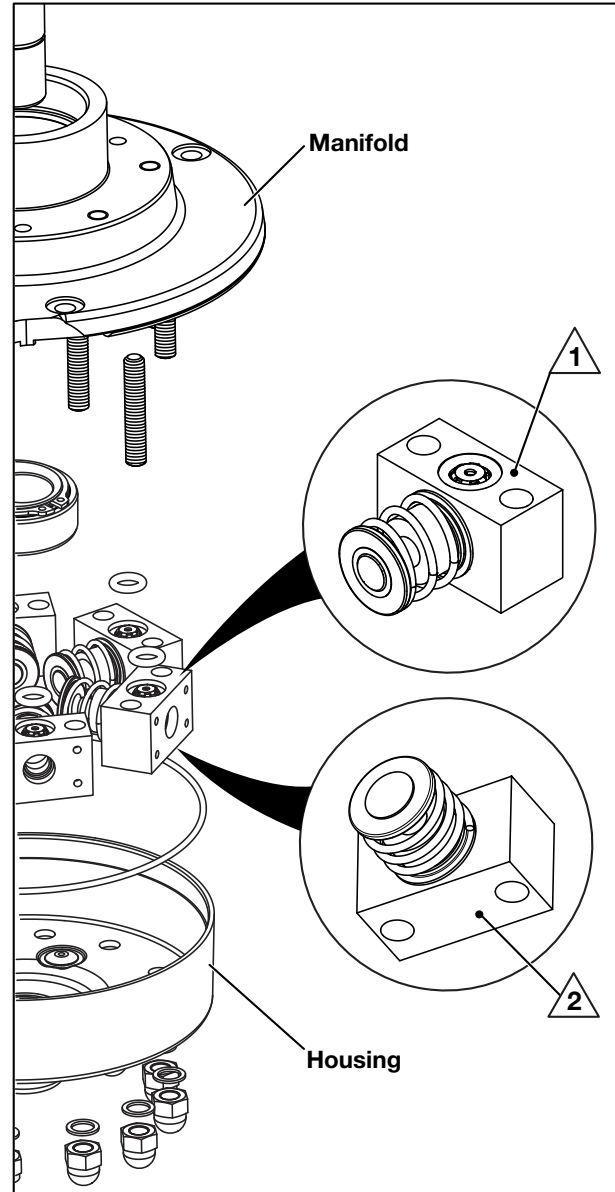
C - Piston Block Assembly Kits: DD7230900SR and DD7231900SR
